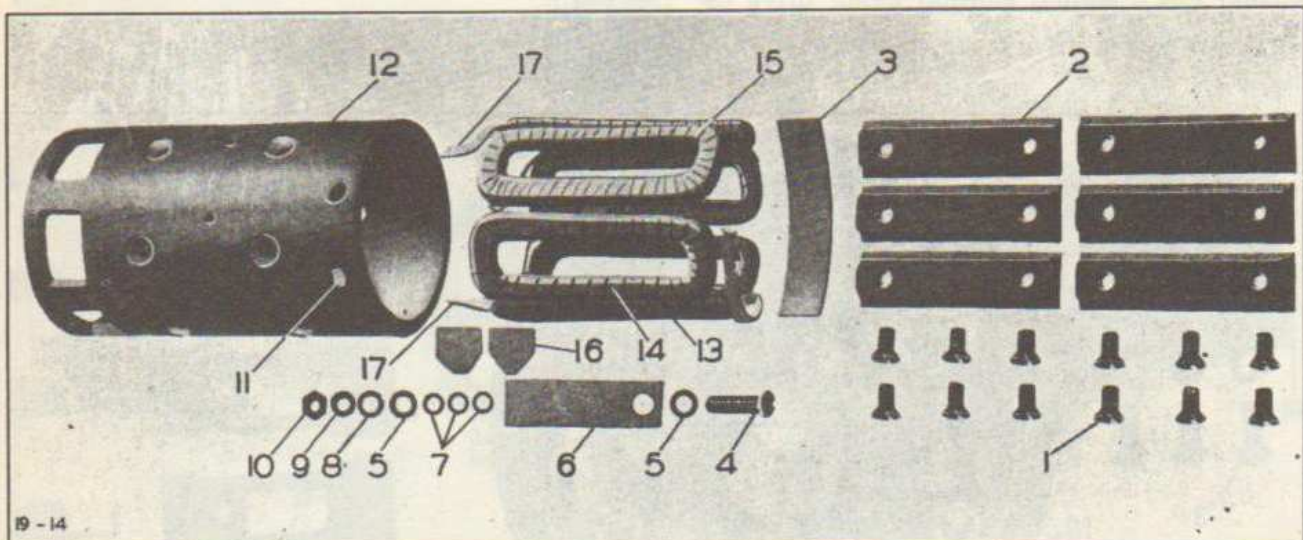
Exploded View of Starting Motor Field Frame Assembly
